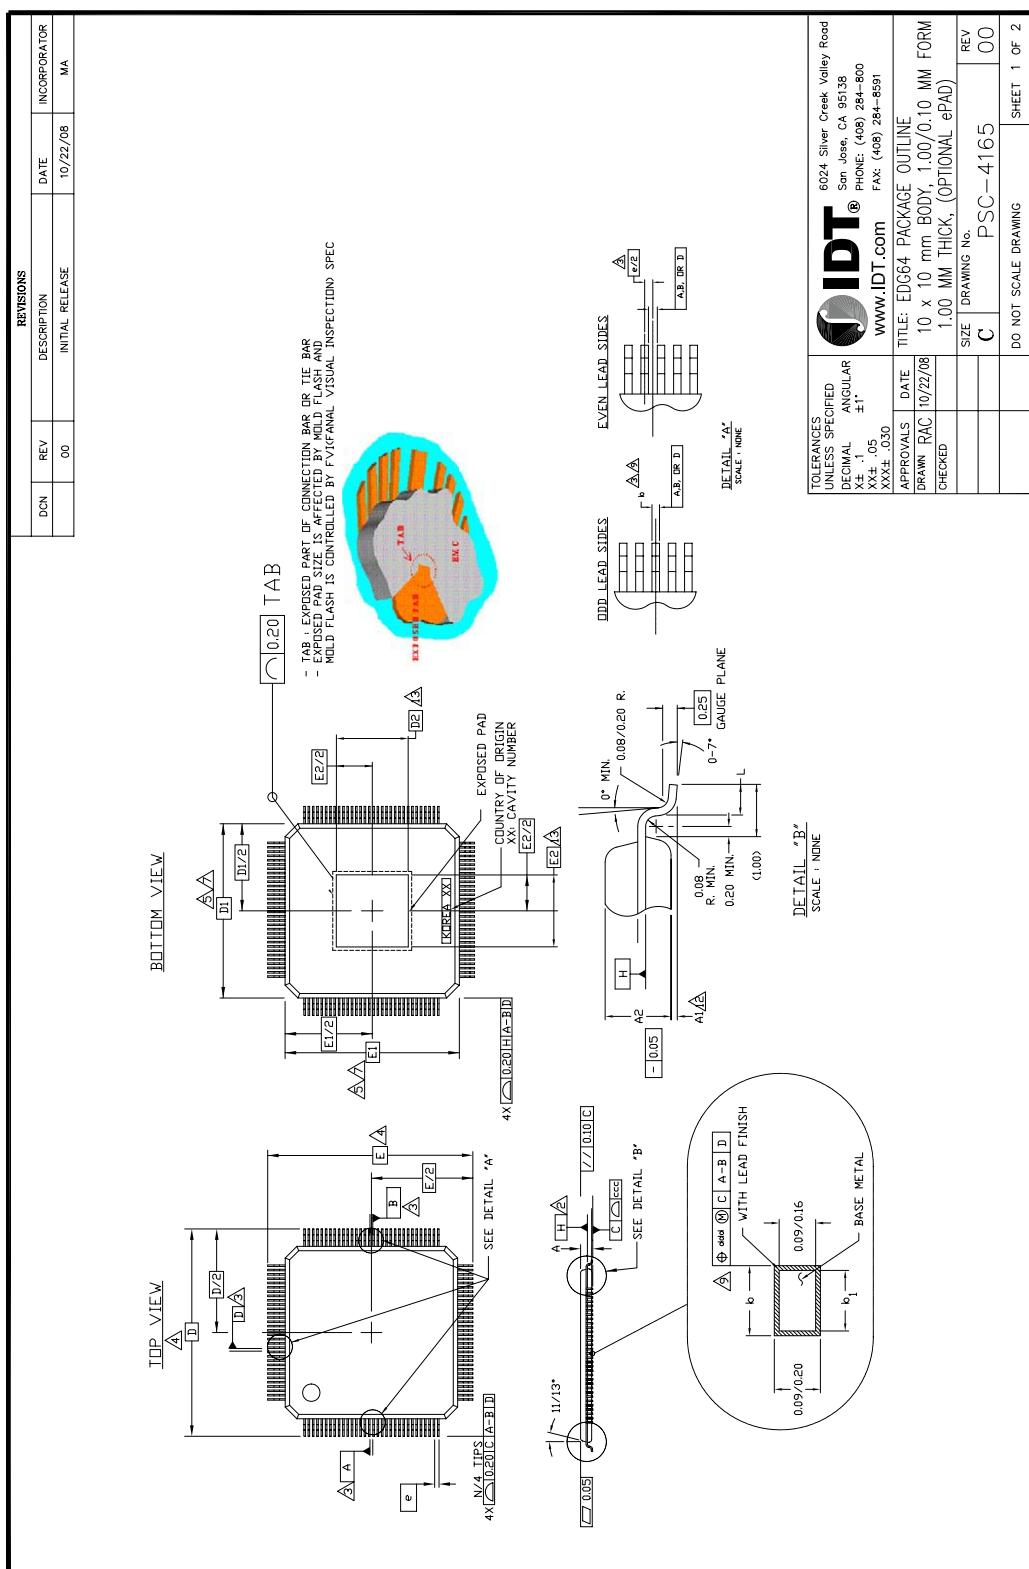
64-Pin EDG Package Dimensions (a) (in Millimeters)
